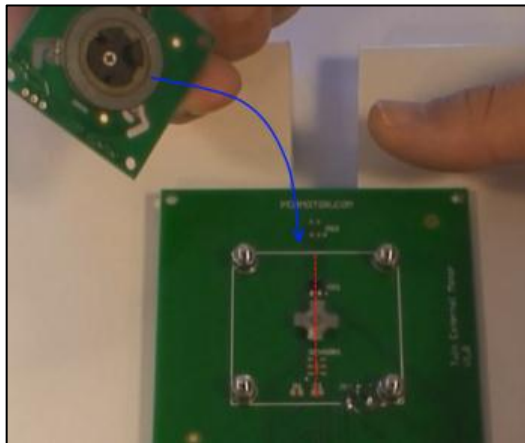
Check that the coupling and center screw are aligned before placing the motor on the base plate
